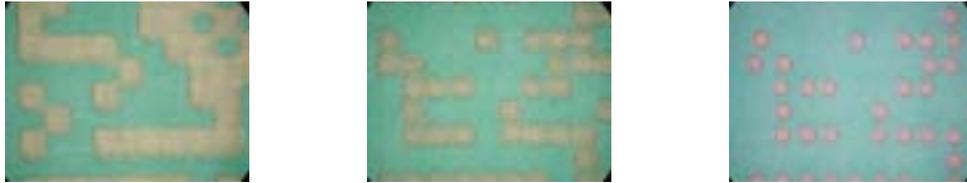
Example of cell marking pattern (glass epoxy PCB)
